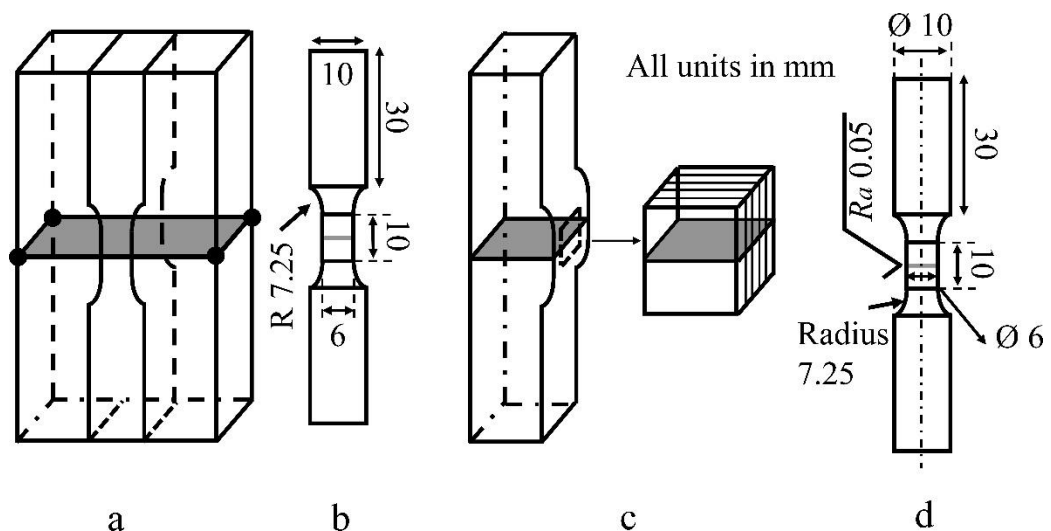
Brazer joint configurations with respect to the longitudinal loading direction: (a) joint at 90°; (b) flat tensile test specimen and dimensions (thickness = 3 mm); (c) sampling location for microstructure characterisation; (d) cylindrical specimen for high cycle fatigue tests
